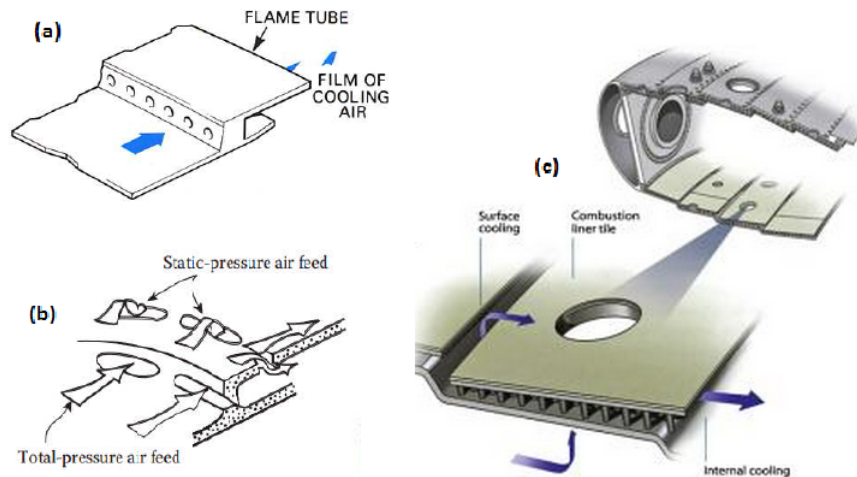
Combustion chamber wall-cooling devices; (a) stacked ring, (b) machined ring, (c) ceramic-coating tiles [43] [14] [52].
